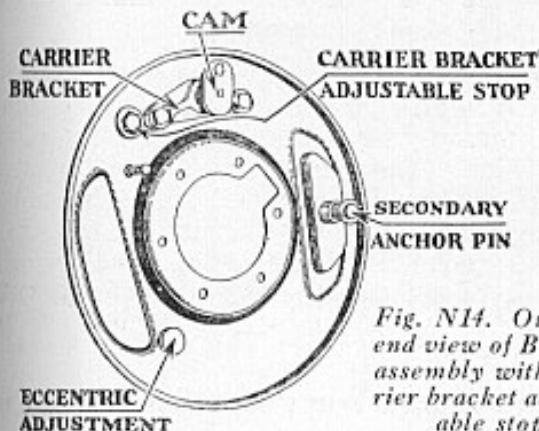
Outside end view of Bendix assembly with carrier bracket adjustable stop
